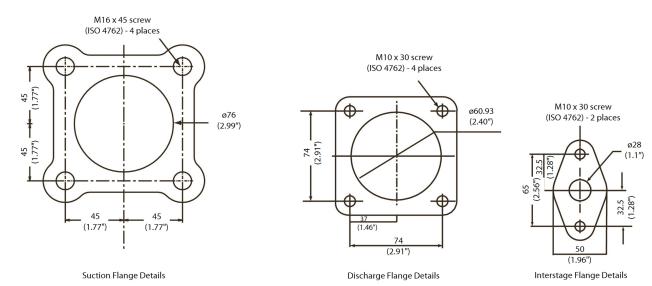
TTS300 and TGS230 Flange Footprint Details
